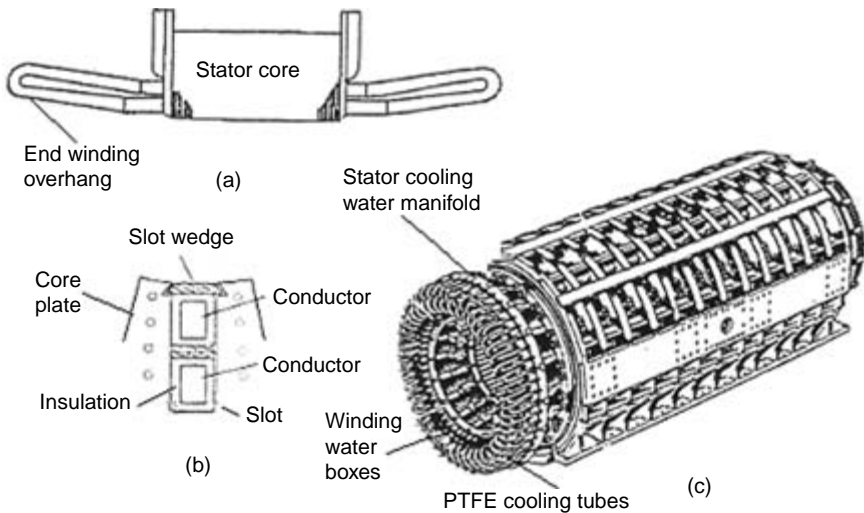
Layout of coils/bars and insulation in AC stator winding. (a) Core and end windings (overhang); (b) Turns/bars in slot; (c) Large water-cooled turbine generator stator
